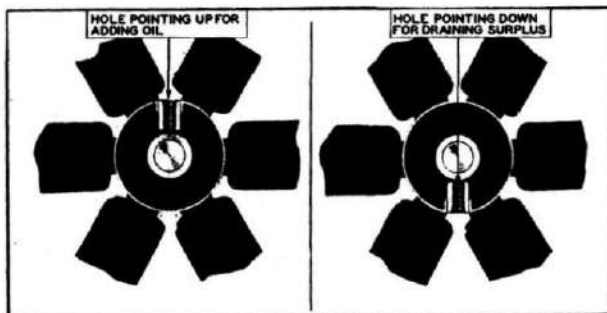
Oil for lubricating the fan is carried in the fan hub. The supply should be replenished every 1000 miles. Grease or heavy oil must never be used in the fan.
